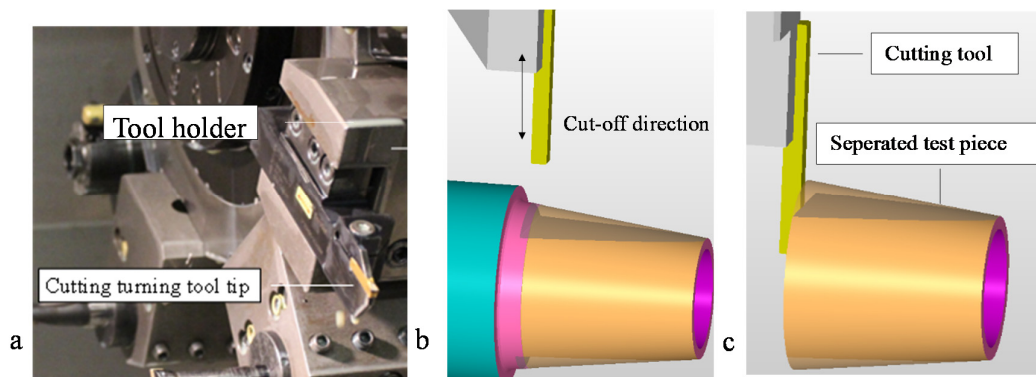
Illustration of cut-off (a) toolset-up (b) direction (c) part.
